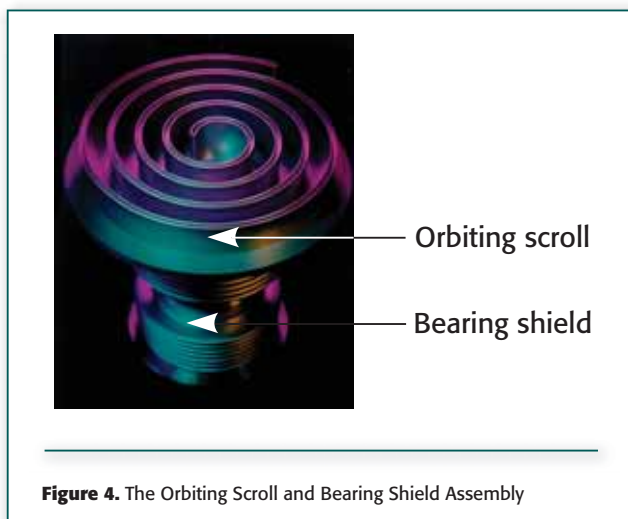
The Orbiting Scroll and Bearing Shield Assembly
